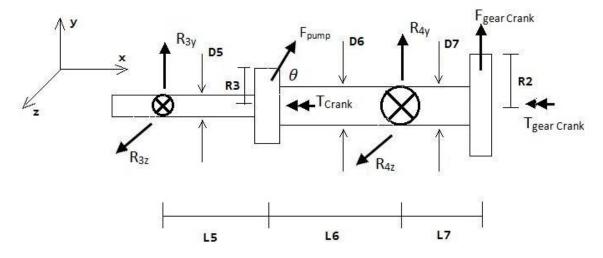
The crankshaft and the forces acting on it. Unlike the main shaft, which has 4 sections, the crankshaft is separated into 3 sections.
